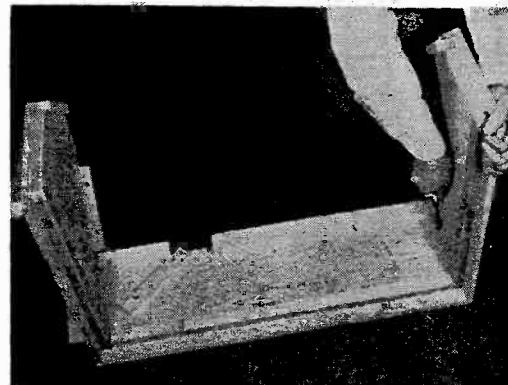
Top and bottom panels should be attached to one side panel with screws and glue. Other side panel then goes on.
